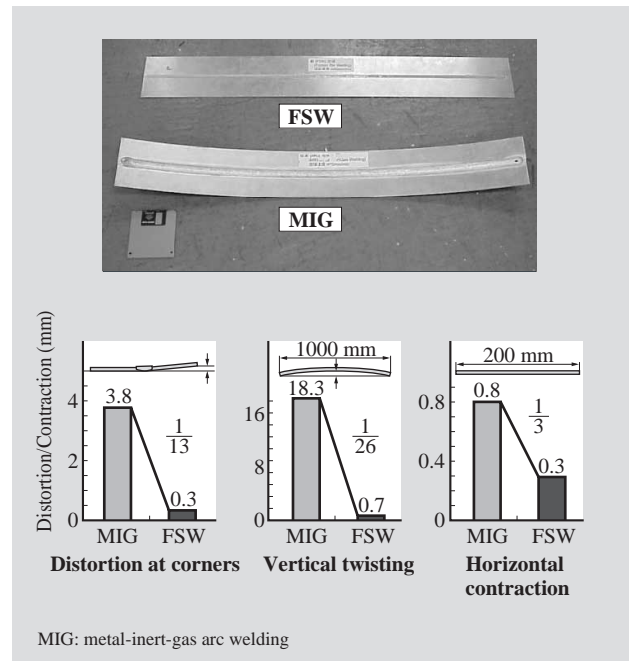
The Amount of Distortion/Contraction in FSW and MIG Welding.
